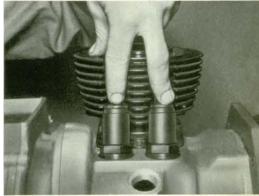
Tools: Piston ring compressor, piston board, drift to adapt pushrod covering tubes No. 530, open ended spanner 14 mm, hammer.
